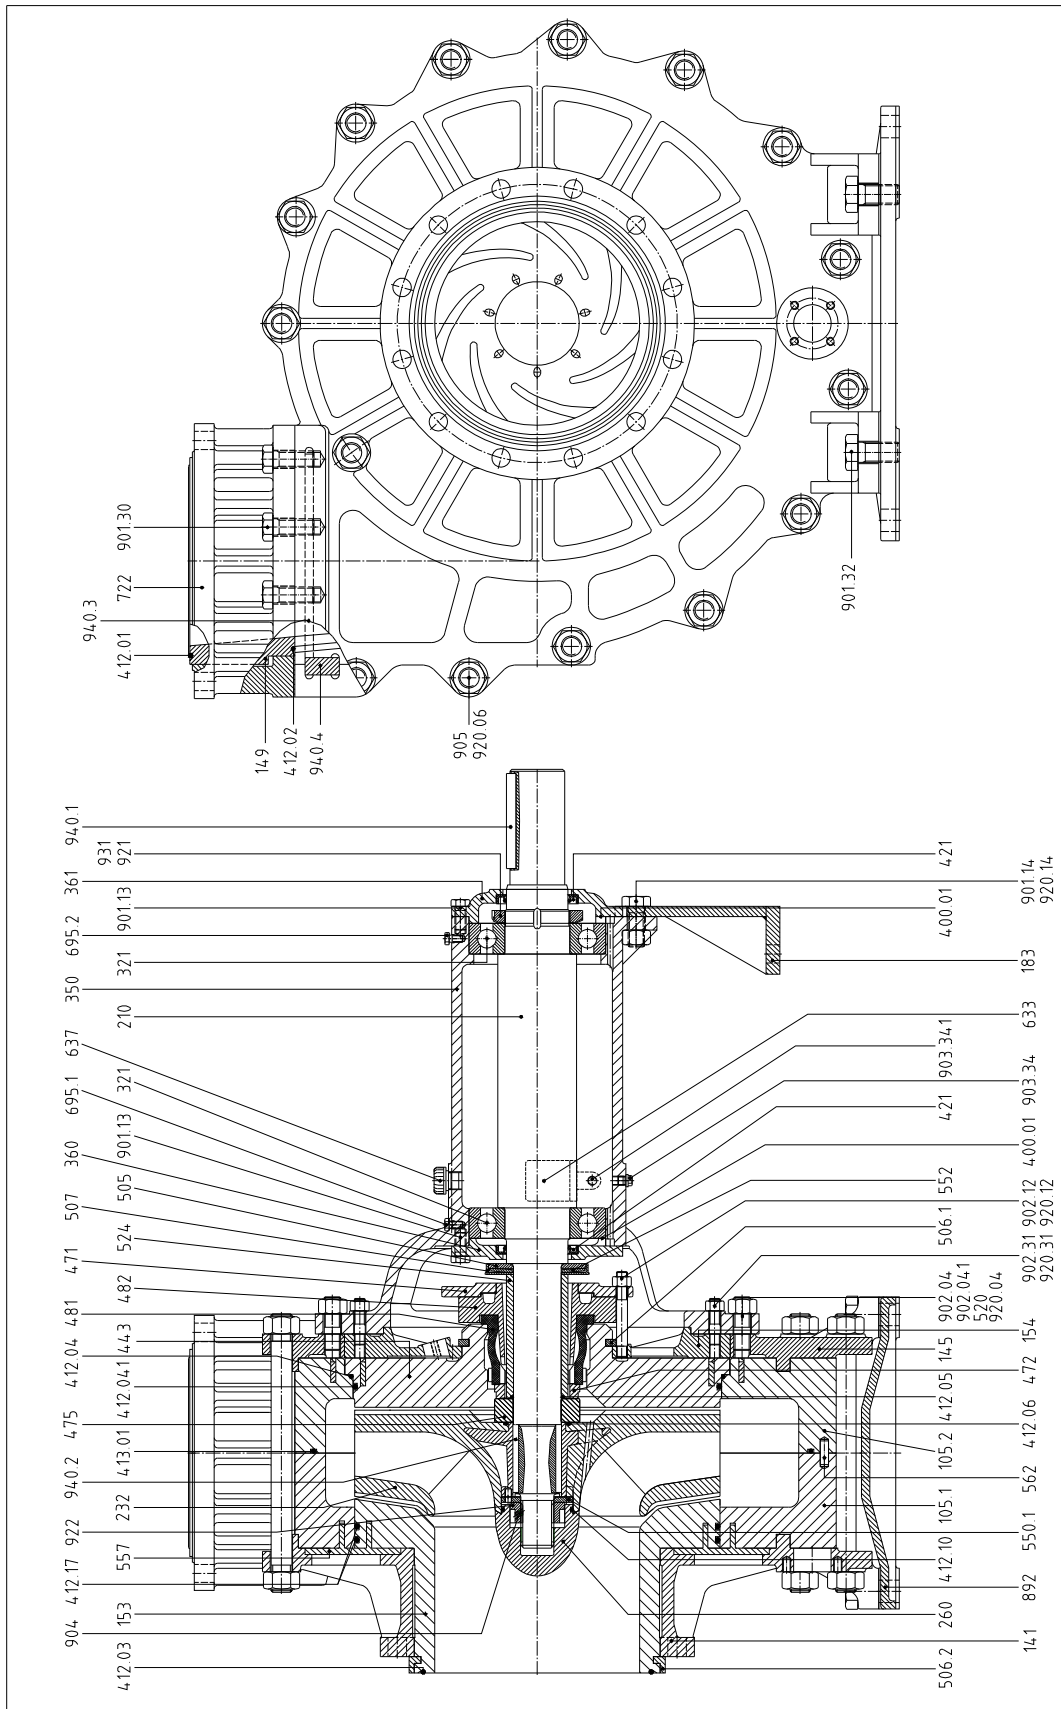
Section of a pump of the SP series in process design with single WERNERT–bellows mechanical seal.
